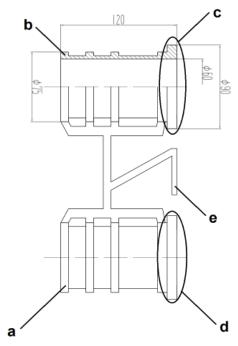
Lay-out of a mould with shown location of cavities and structure of gating system: a) lower casting (L), b) upper casting (H), c) and d) places of taking samples, e) gating system
